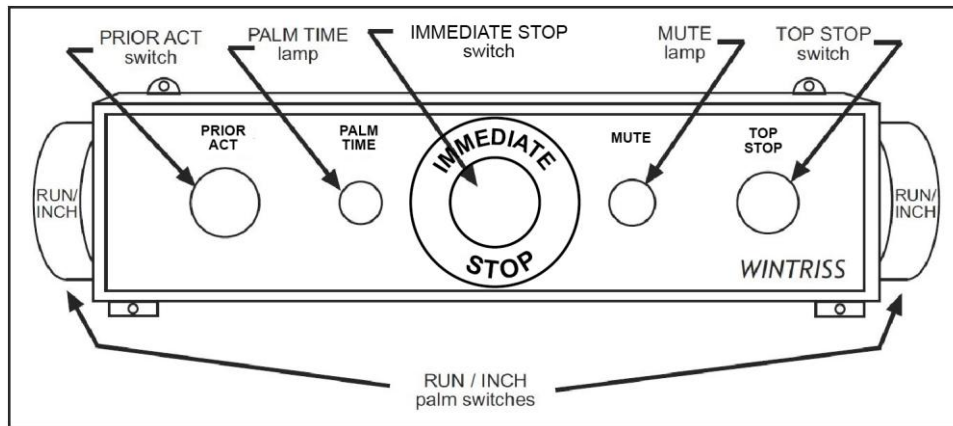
Operator Station Components (Side-mounted Run/Inch Palm Buttons)
